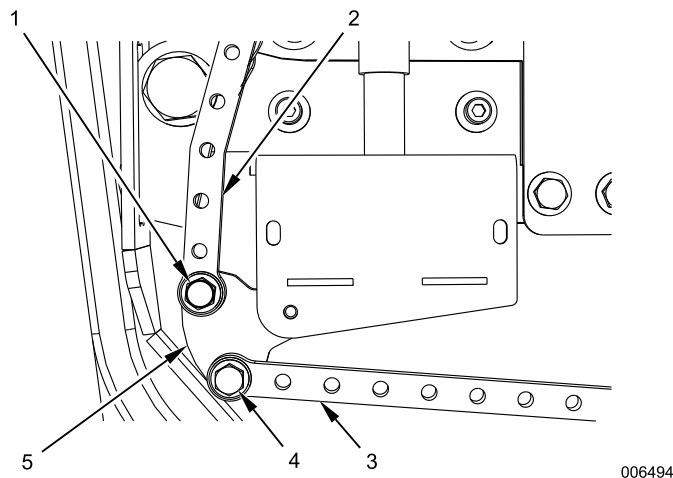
Combat Lock Shaft Lever and Vertical Shaft Lever Removal from Combat Lock Bellcrank.
